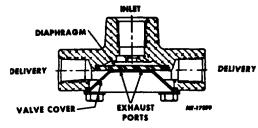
Sectional View of Midland-Ross Quick Release Valve
